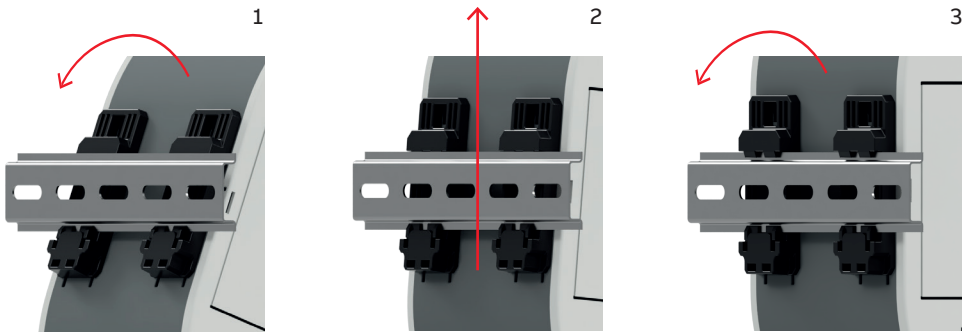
Mounting ATS Controller OXCO\_ on the DIN rail.
